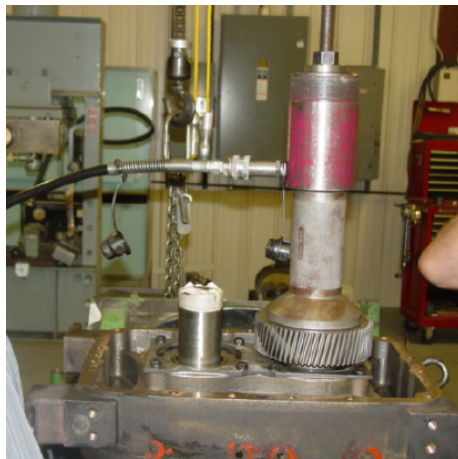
PRESS GEAR ONTO SHAFT
